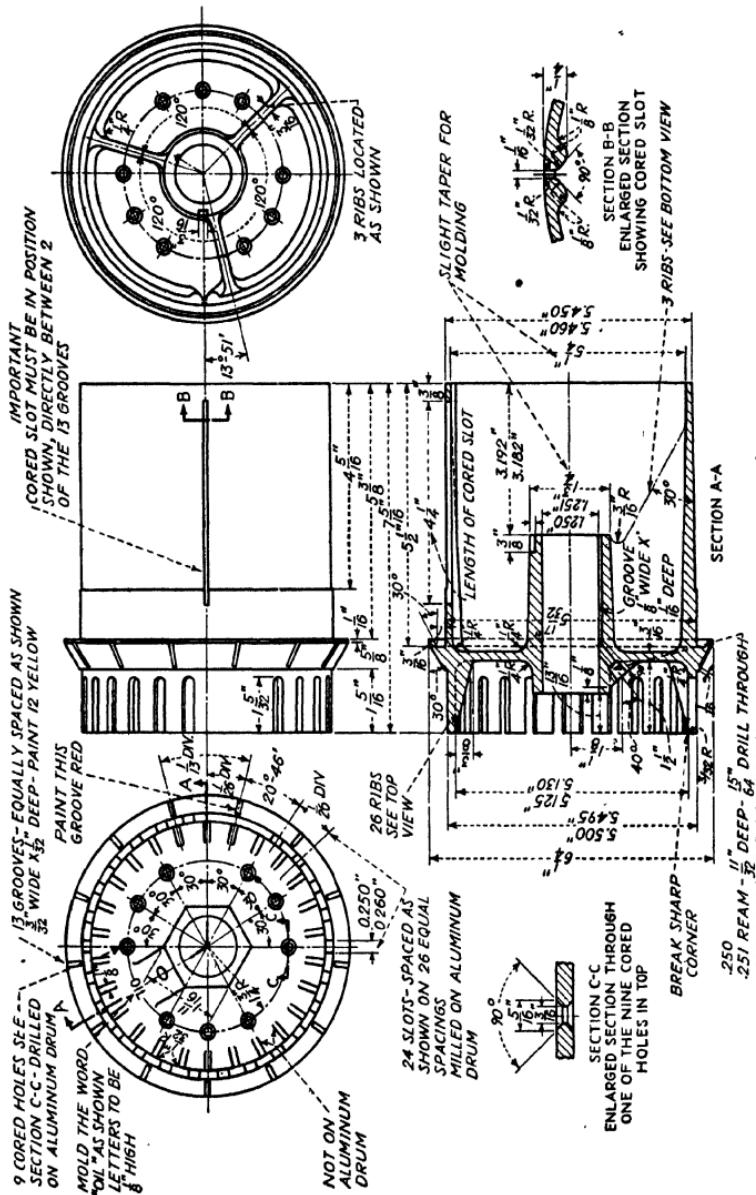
Dial drum for Warner and Swasey turret lathe, an excellent example of the use of phenolic plastic in machinery. Notes give an indication of the machining required on the previous aluminum design.
